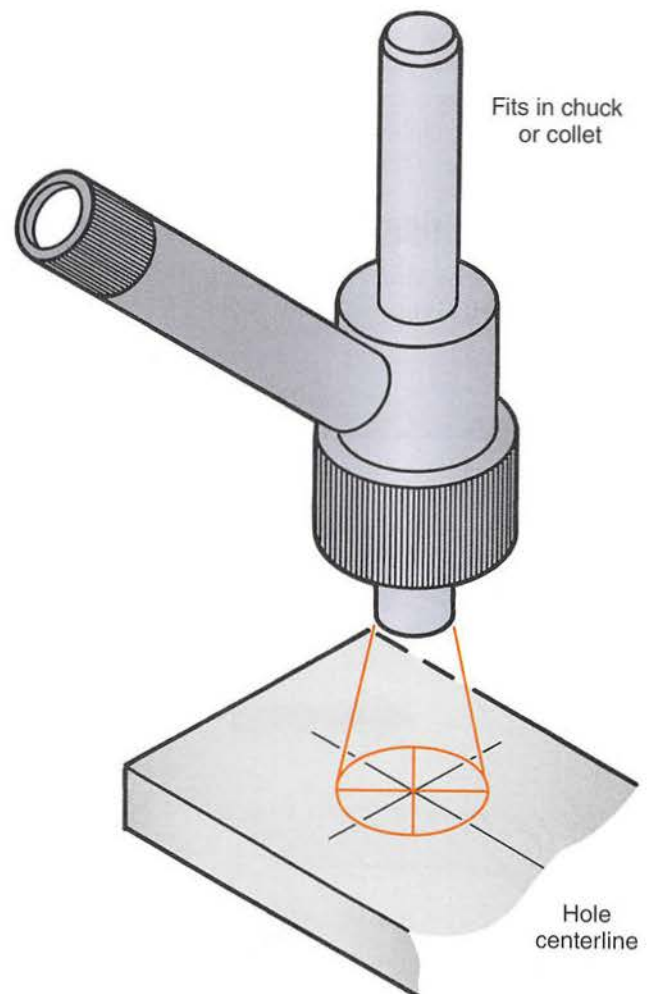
Accuracy can be ensured when locating holes on a milling machine by aligning the first hole with a "wiggler."
